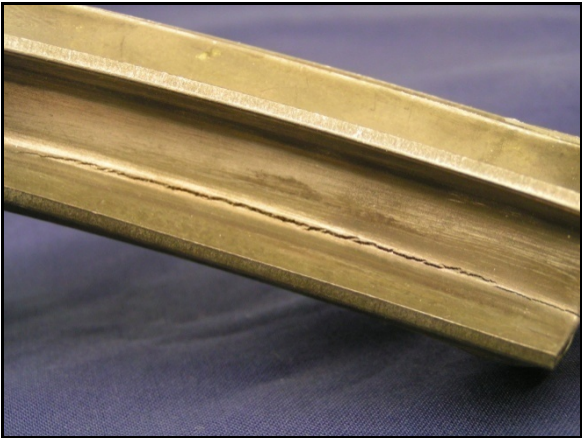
Failed V-band clamp that was assembled to turbocharger for a diesel engine
